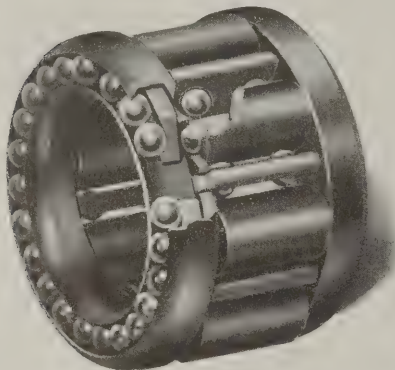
The Johnson Bearing for taking Both Radial Load and End Thrust
